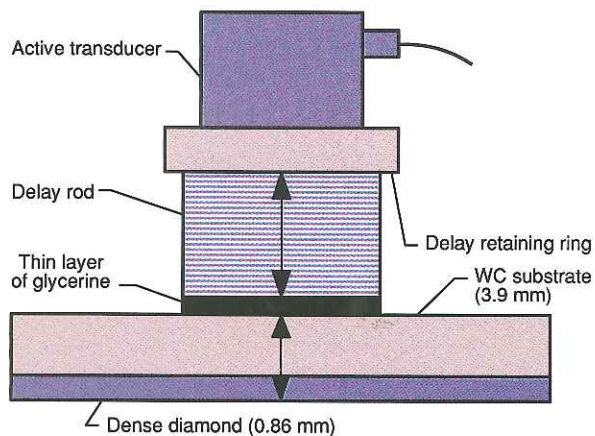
Coupling of a delay line  $\lambda$ -series transducer to a diamond-deposited WC tool showing the critical dimensions of the test sample.
